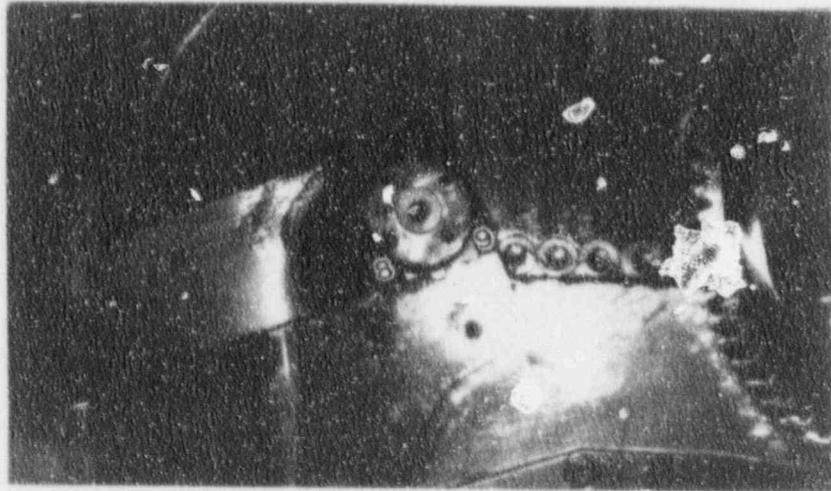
View of the left rear end sheet of the 20 cylinder engine of 2G003, showing the location of the bolt holes for the 2 vertical bolts that attach the bracket to the engine end sheet.
